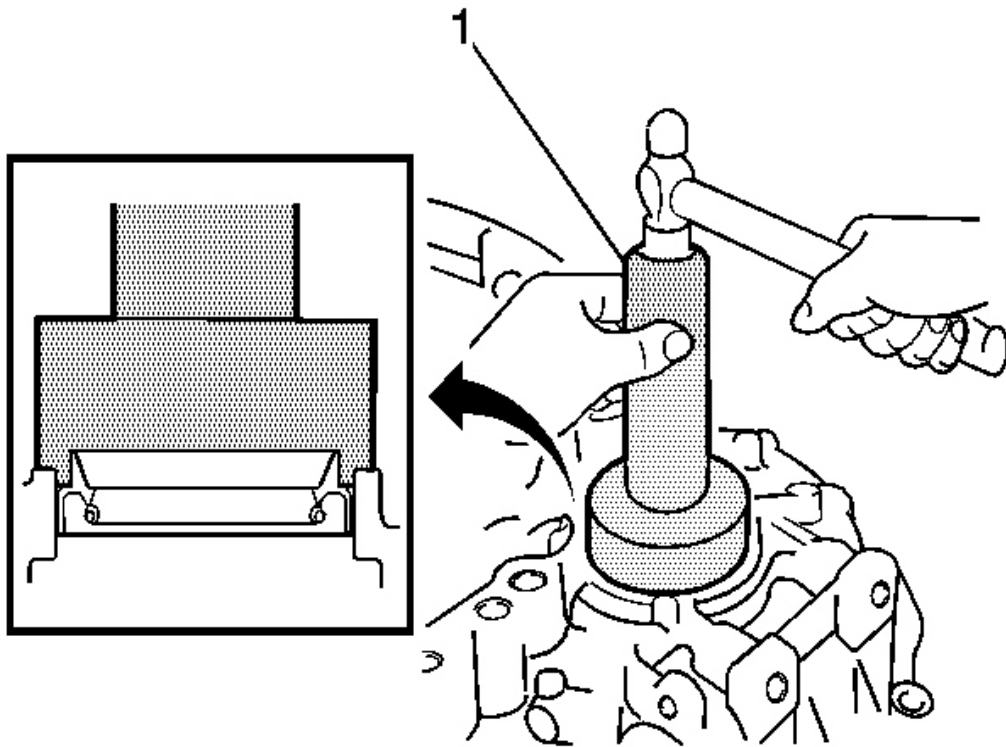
Driving In A Transaxle Housing Oil Seal Using A Hammer & DT 46471
